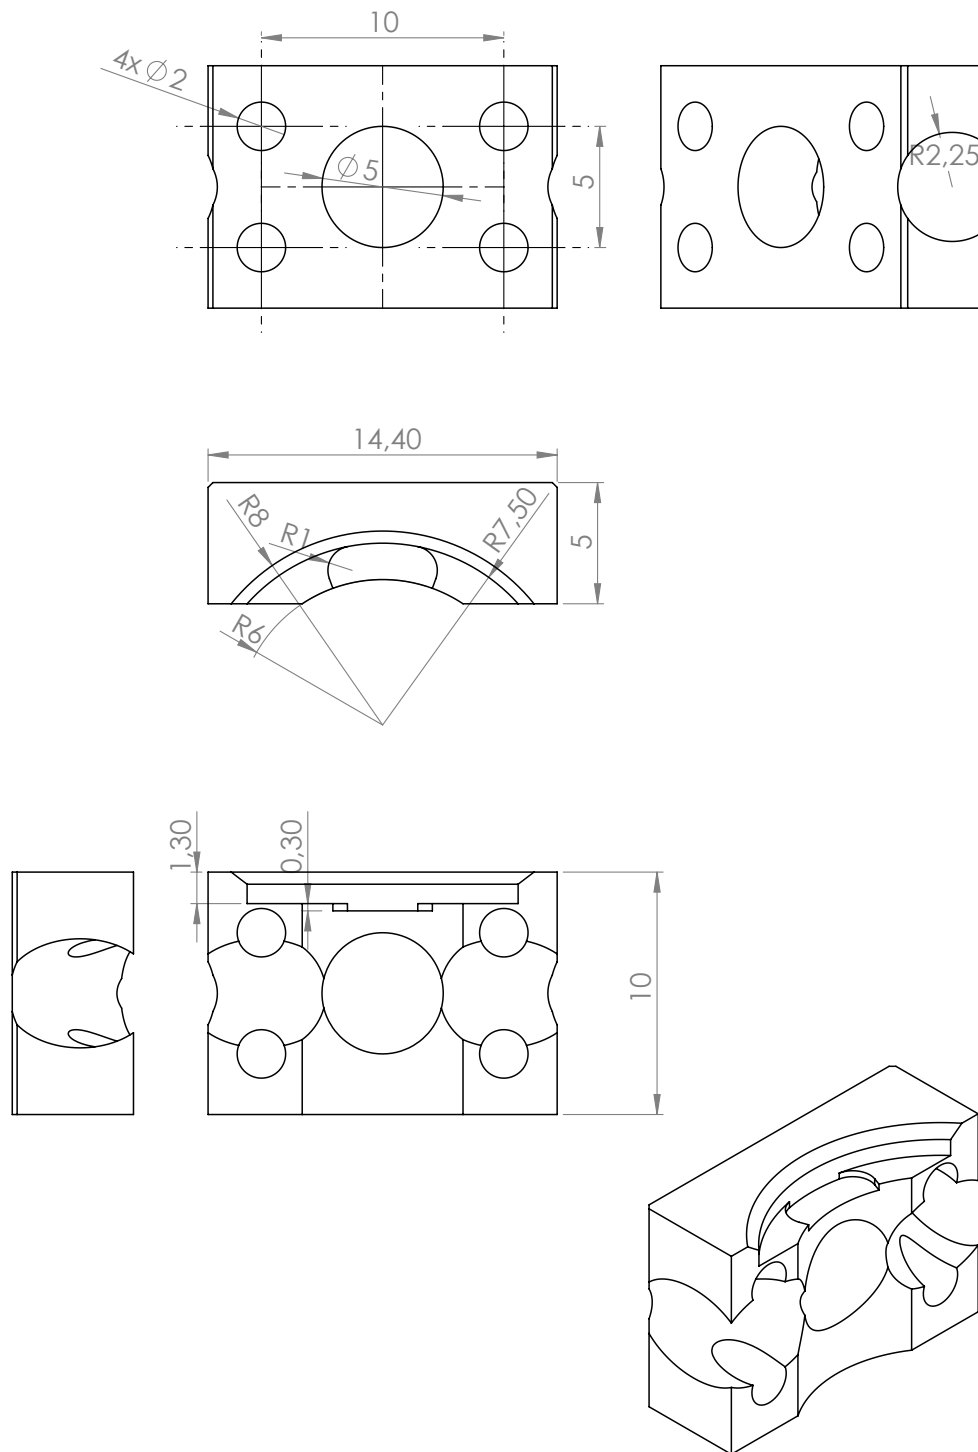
Technical drawing of the lens holders in the glass cell science chamber. Dimensions are given in millimeter. Material: Macor[®].
